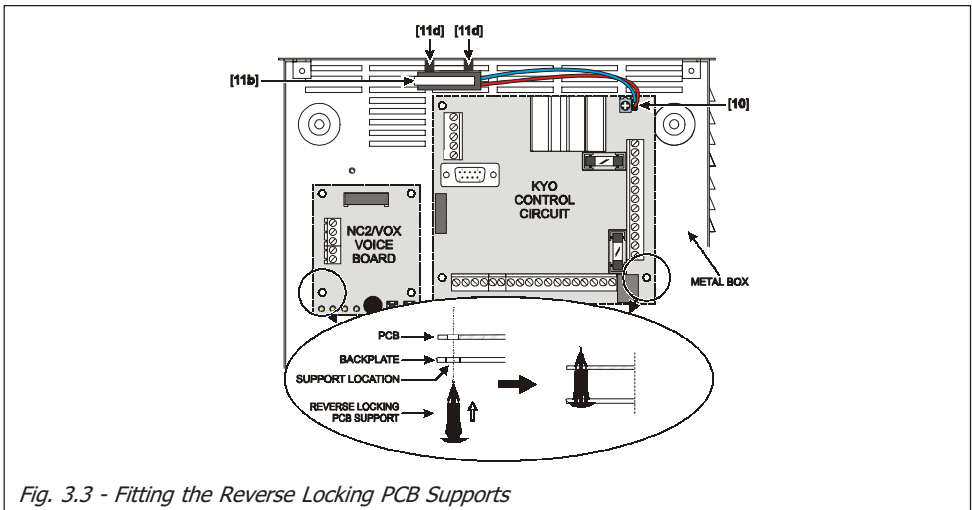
Fitting the Reverse Locking PCB Supports
